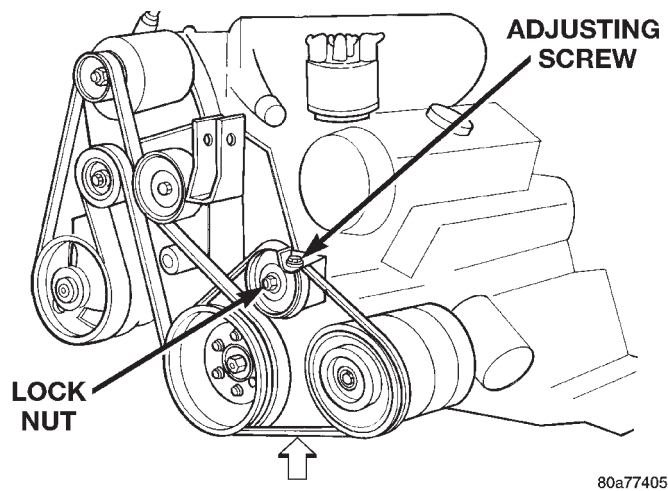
Air Conditioning Drive Belt—3.0L Engine
